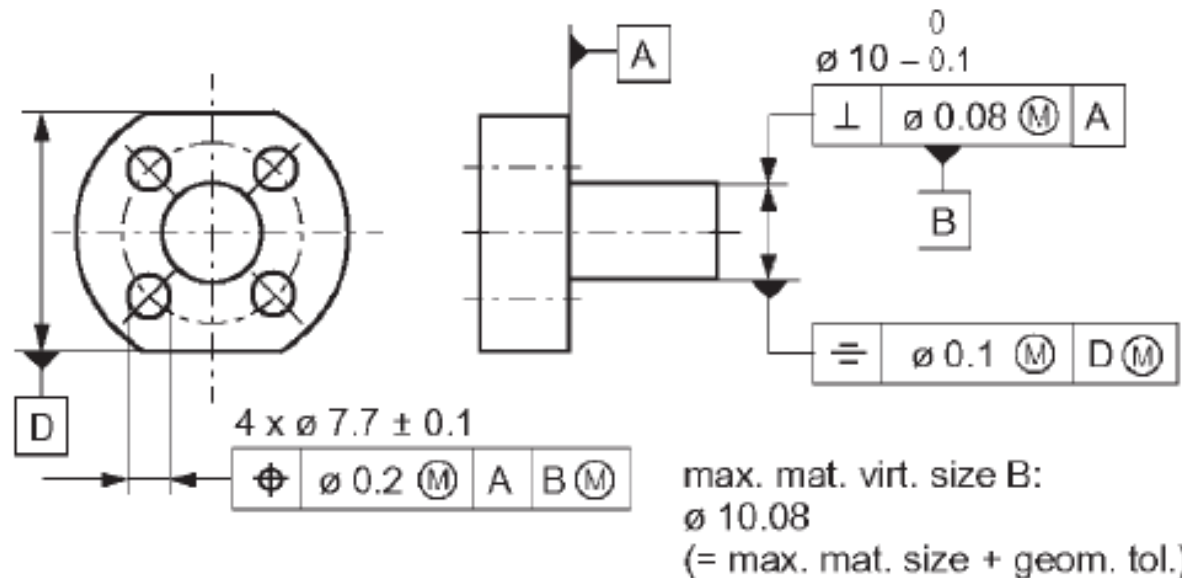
Maximum material virtual size of datum B; perpendicularity tolerance to be regarded but symmetry tolerance to be disregarded
